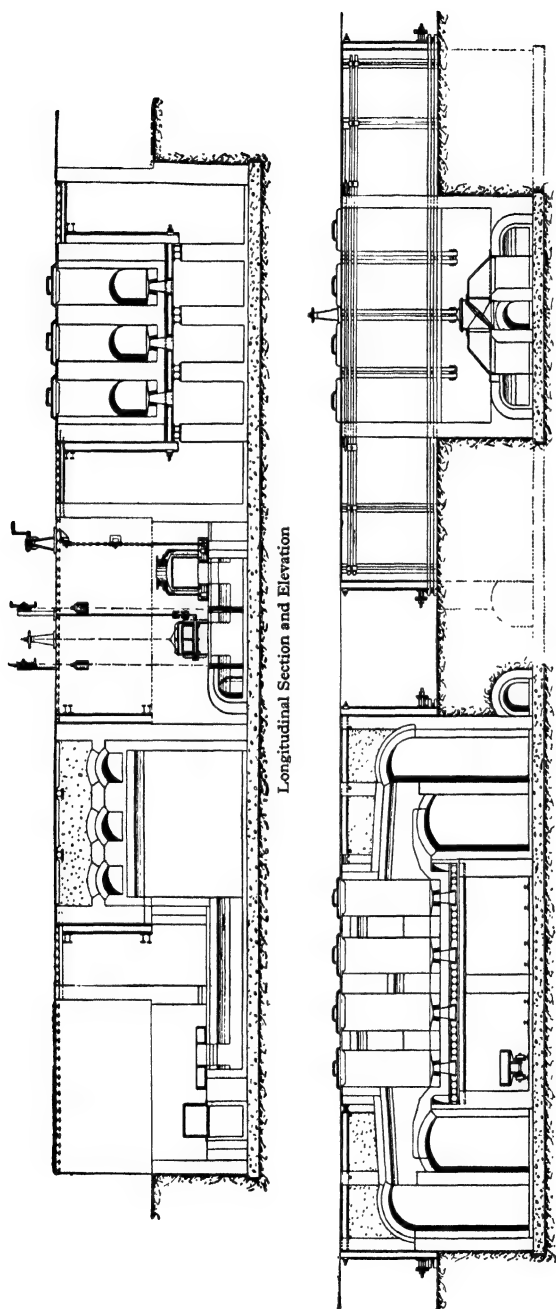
Soaking Furnaces Heated with Blast Furnace Gas (Stemens)
